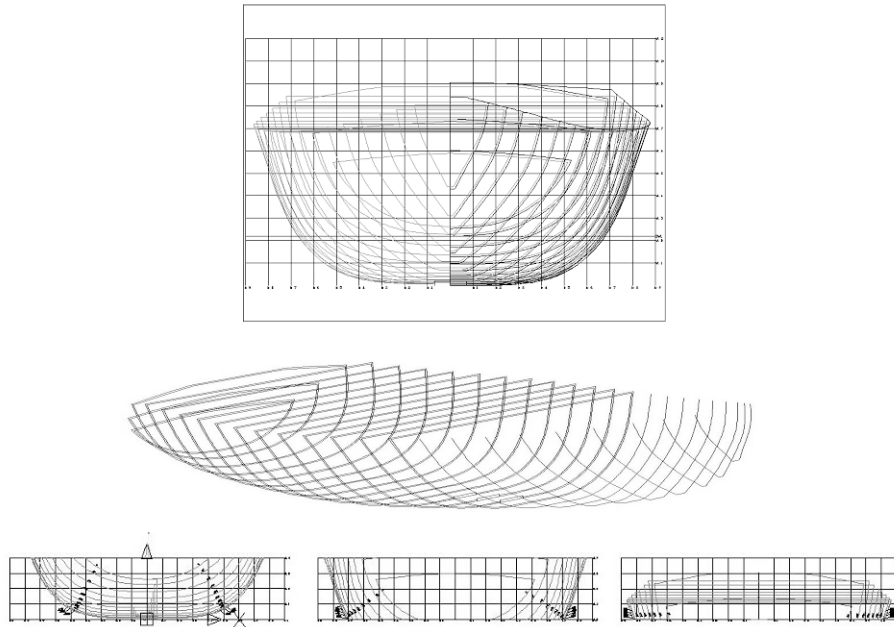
7mm deduct body plan of design ship(for frame cutting).
